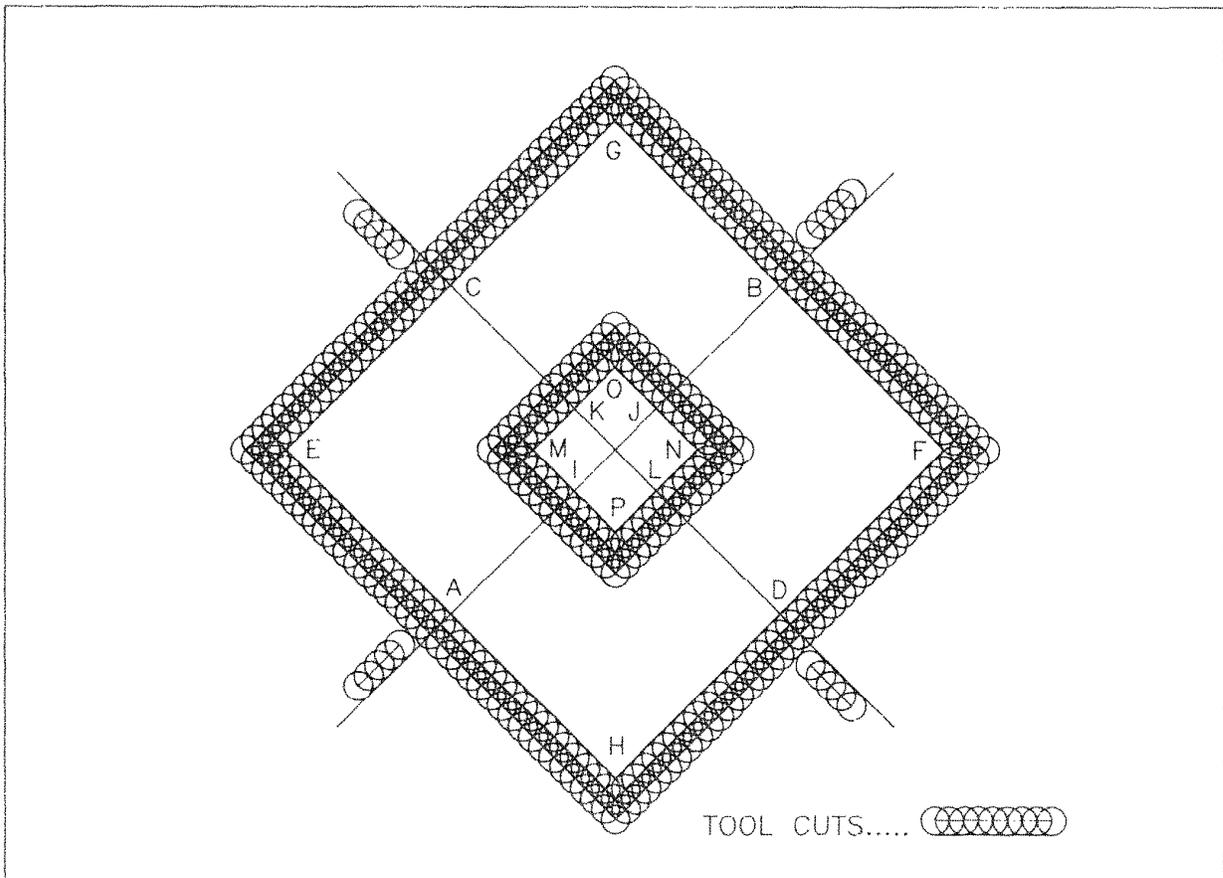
Drawing showing accuracy cuts in specified raw material and measurement points for both the 2-inch and 8-inch diamonds.
